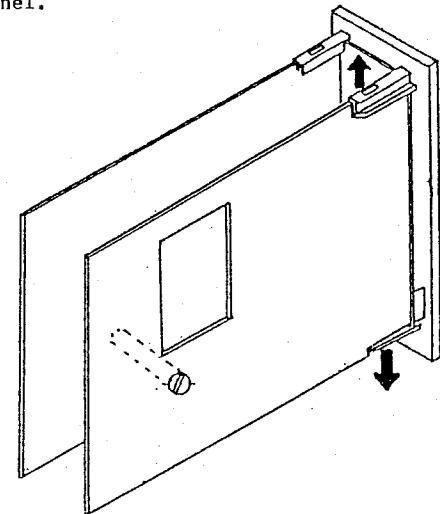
SEPARATING THE OPTIONS PCB
